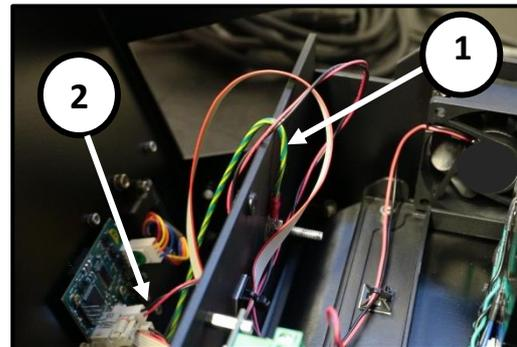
REMOVING THE UPPER PART (1/3)
